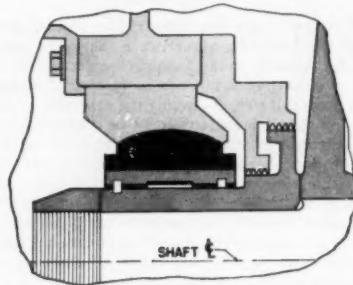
AIRCRAFT GAS-TURBINE BEARING—JOURNAL TYPE
